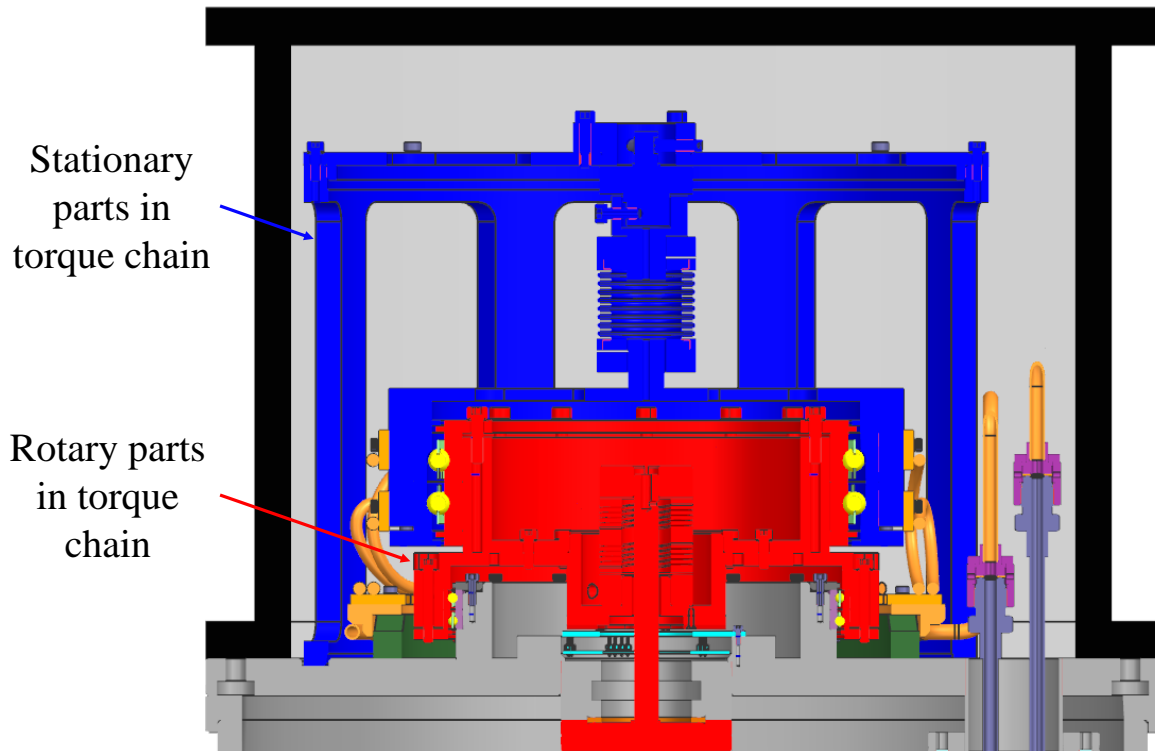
Testing rig - rotary (red) and stationary (blue) parts. For visualisation the Biggest possible bearing assembly (3.3.4) is shown
